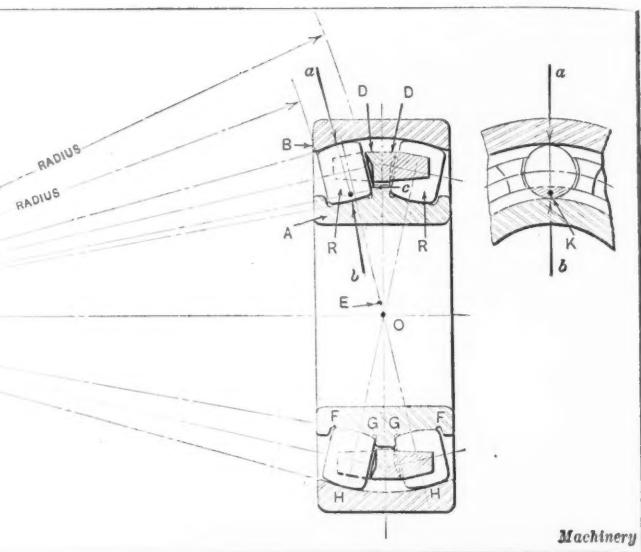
Sectional View, showing Details of Construction of the Spherical-type Roller Bearing
